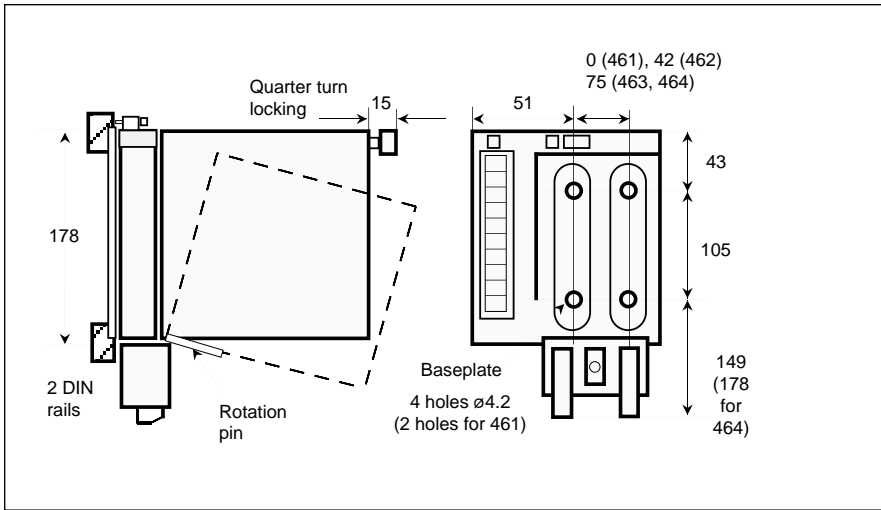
Dimensions for attachment to a vertical wall (mm)
